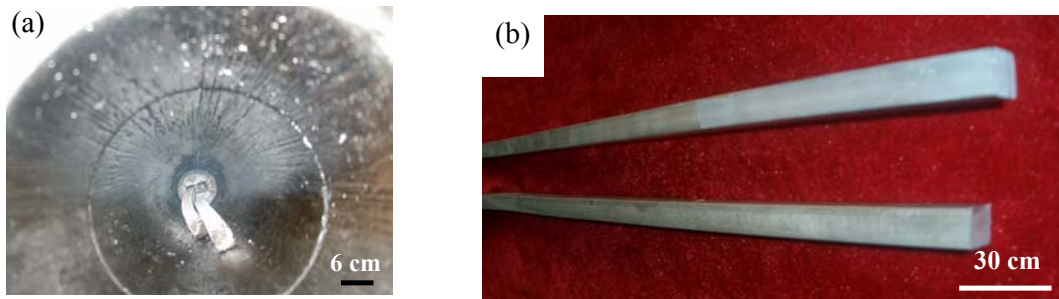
Macro-photograph of (a) the outgoing extrusion die and (b) as-extruded Mg billets.
